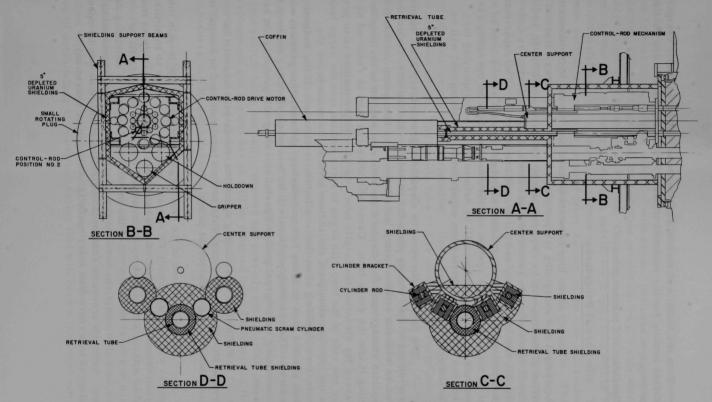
Shielding for Removal or Insertion of EBR-II Packaged Loop
